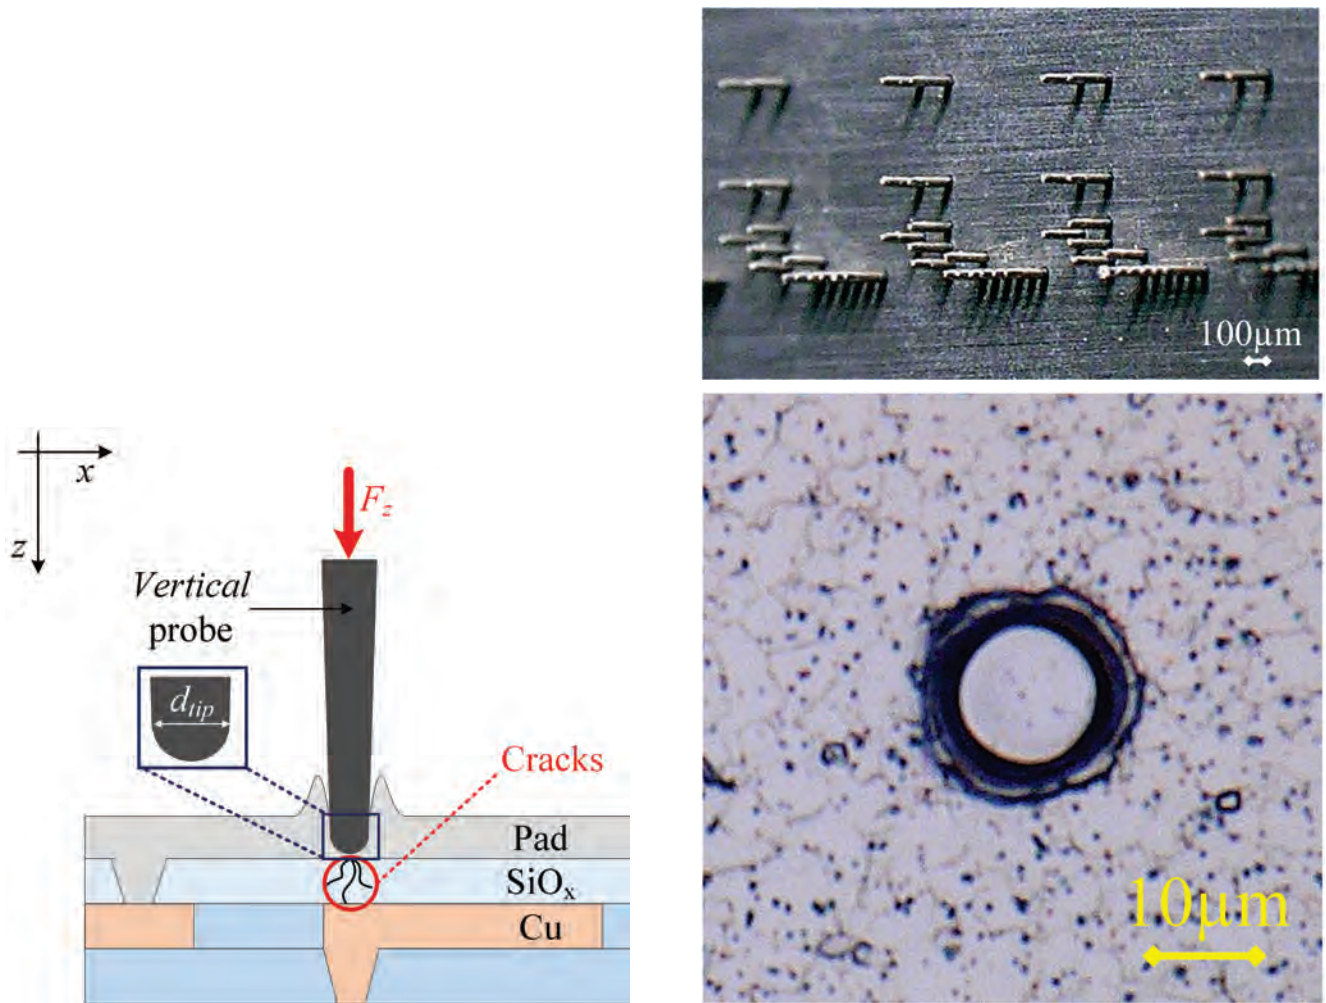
Vertical probe contacting a CMOS technology pad stack and thereby inducing oxide cracks,^[1] left, vertical probes, right top, and imprint on Al-Cu top surface, right bottom.
